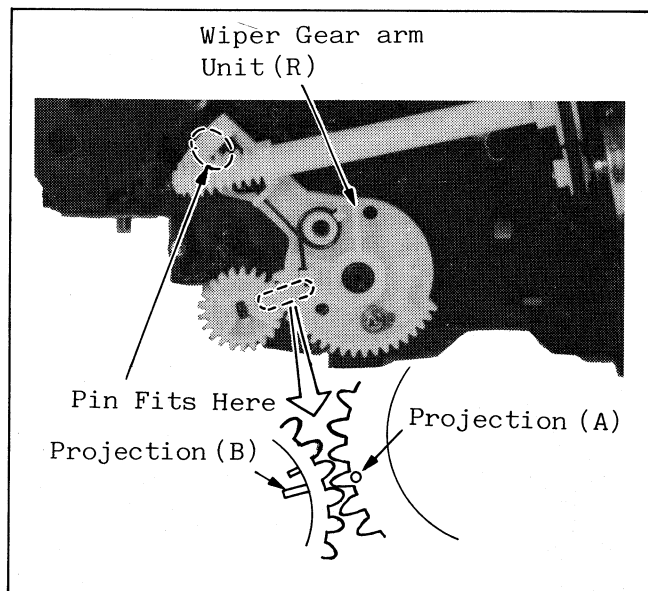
Adjustment of Cassette Up Gears-(3)
